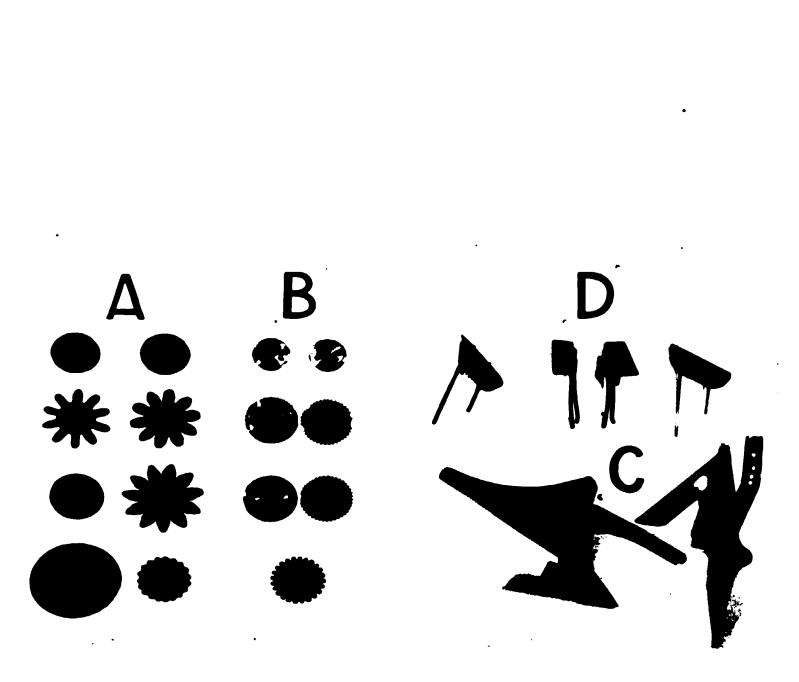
Details of Cutting Units (A & B) and of Front Guides (C & D).
